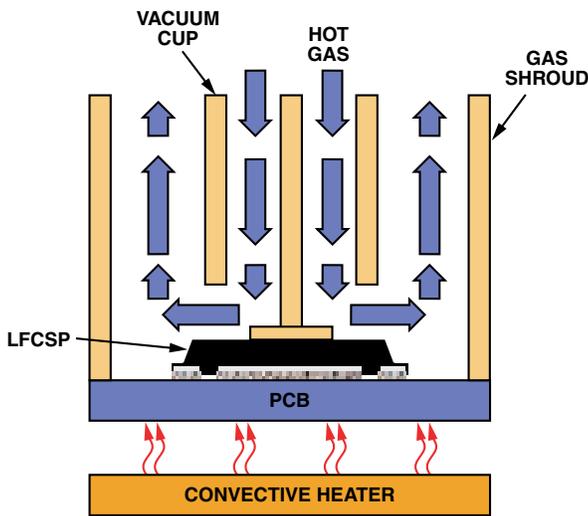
Solder is Reflowed and the LFCSP is Withdrawn Before Solidification
